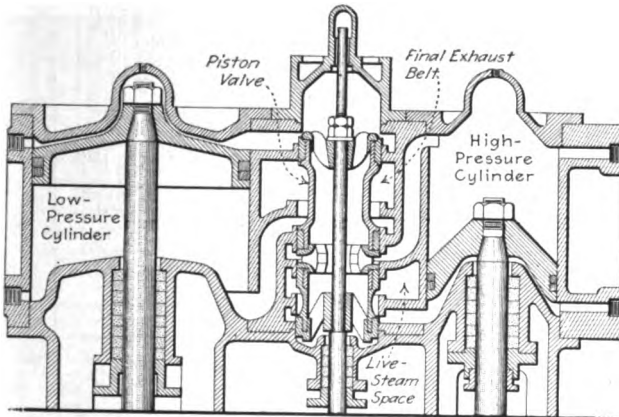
Woolf-compound marine engine. The high-pressure cylinder exhausts directly through the piston valve into the low-pressure cylinder. (For complete details of this engine see Fig. 524.)
